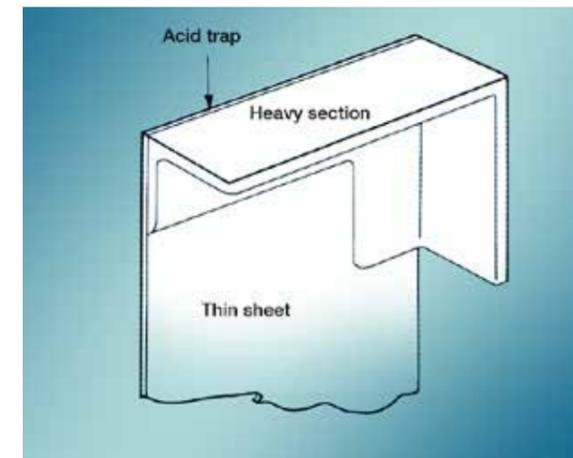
Do not weld parts of widely differing thickness together. The object may be deformed in the zinc bath and during cooling after dipping due to differing heating and cooling rates.
